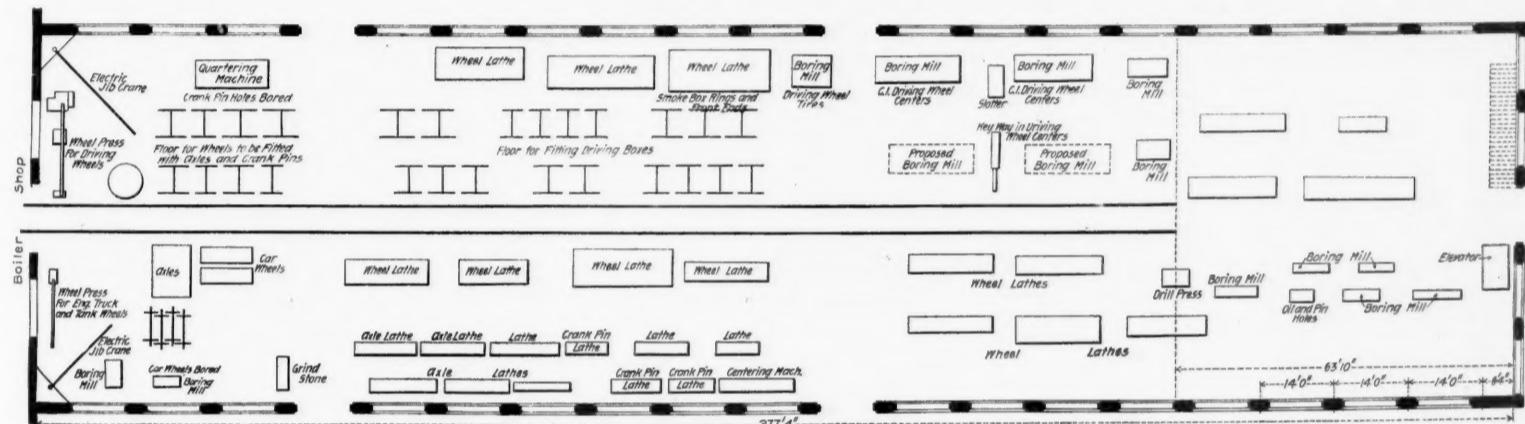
Plan of Altoona Wheel Shop Showing Arrangement of Machinery.
